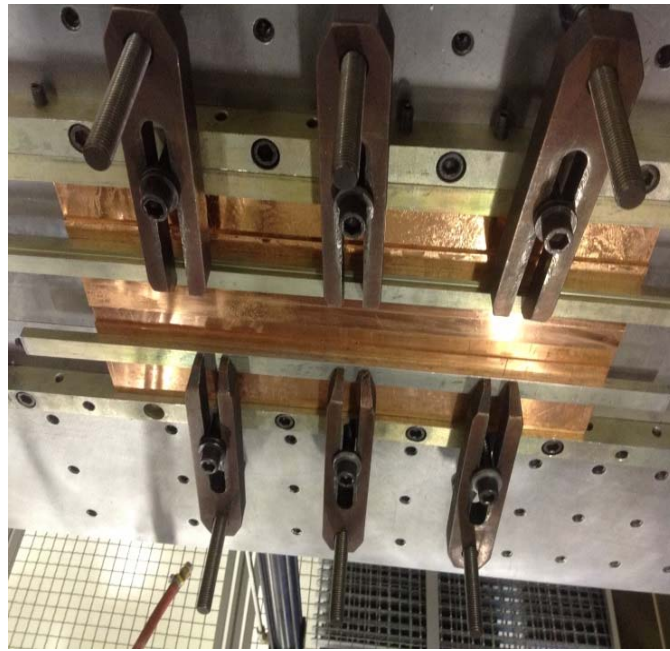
The experimental setup showing the clamping fixture and the backing plate system
